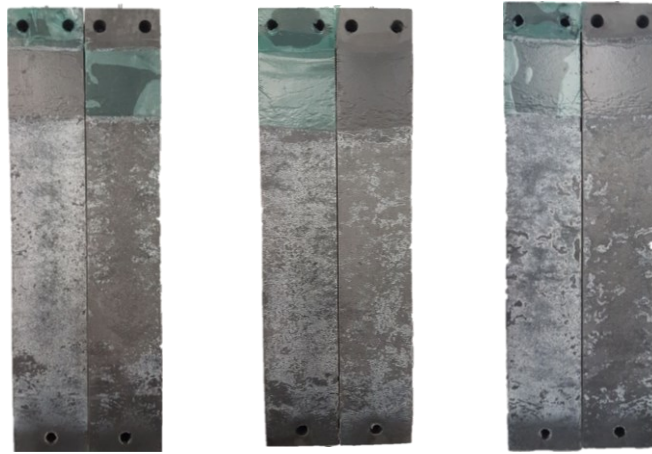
Fracture surface of NBR/PCL 70 samples
